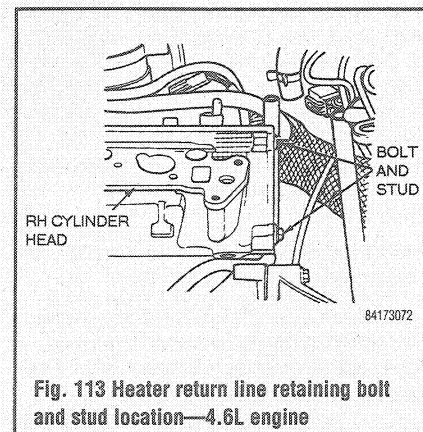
Heater return line retaining bolt and stud location—4.6L engine
